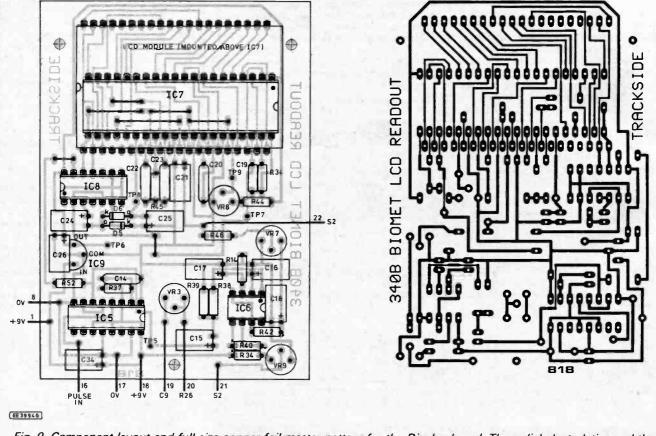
Component layout and full size copper foil master pattern for the Display board. The radial electrolytics and the Philips type polyester capacitors are mounted flat on the board, some covering other components. On the prototype, capacitors C20 and C23 were soldered on the trackside.
